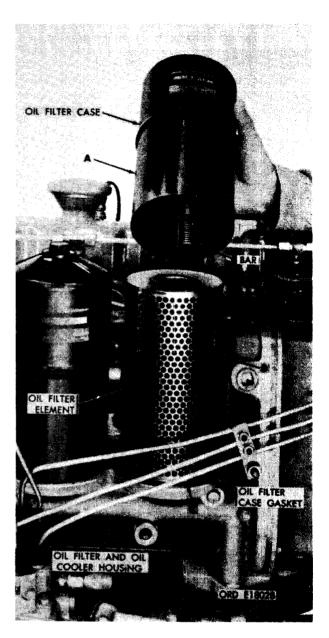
REMOVING OR INSTALLING OIL FILTER ELEMENT.
